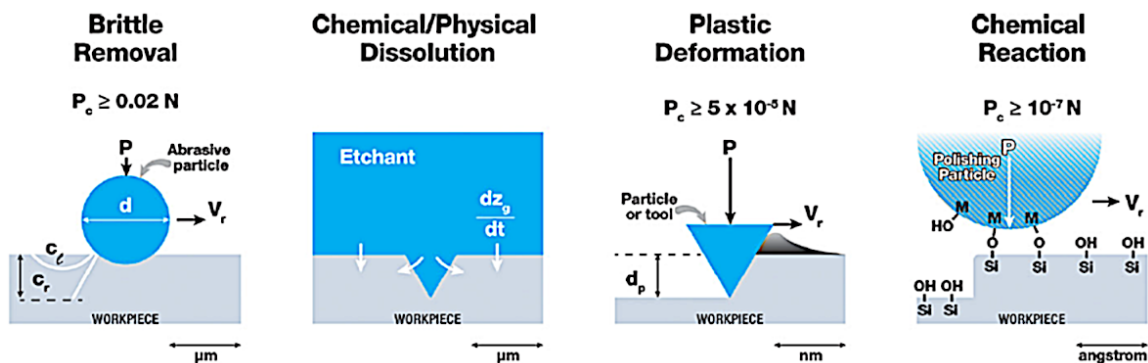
Various removal mechanisms from a workpiece surface after grinding and polishing [1].
